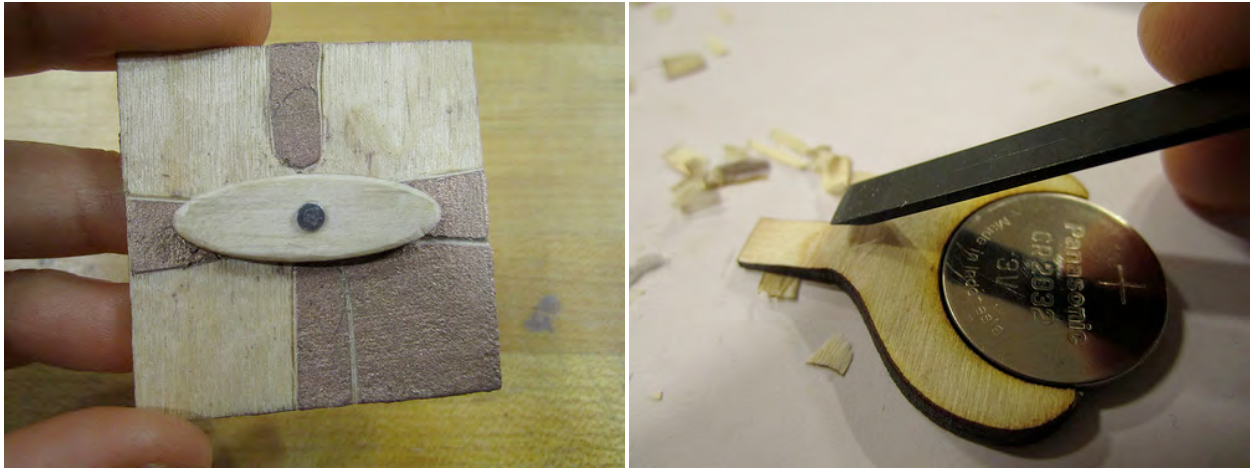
Left: Carved dial with press-fit peg joint. Right: Lasercut press-fit coin-cell battery holder being carved to create a sloped surface.
